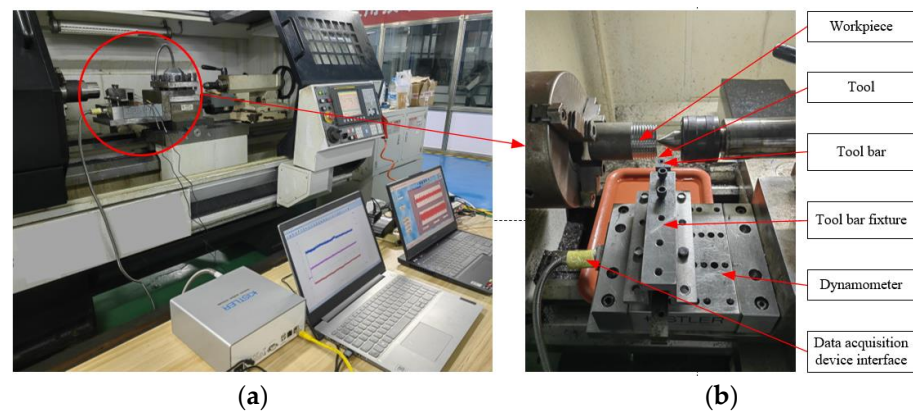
Orthogonal cutting test platform: (a) integrated graph; (b) partially enlarged detail.
